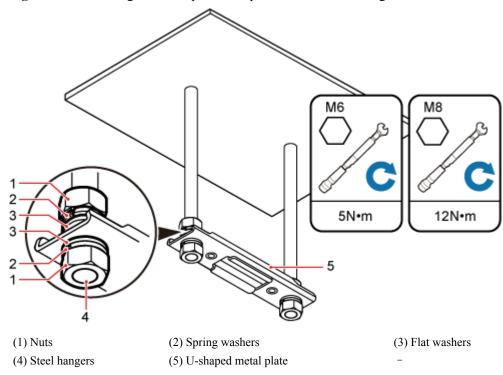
Installing the U-shaped metal plate onto the steel hangers
